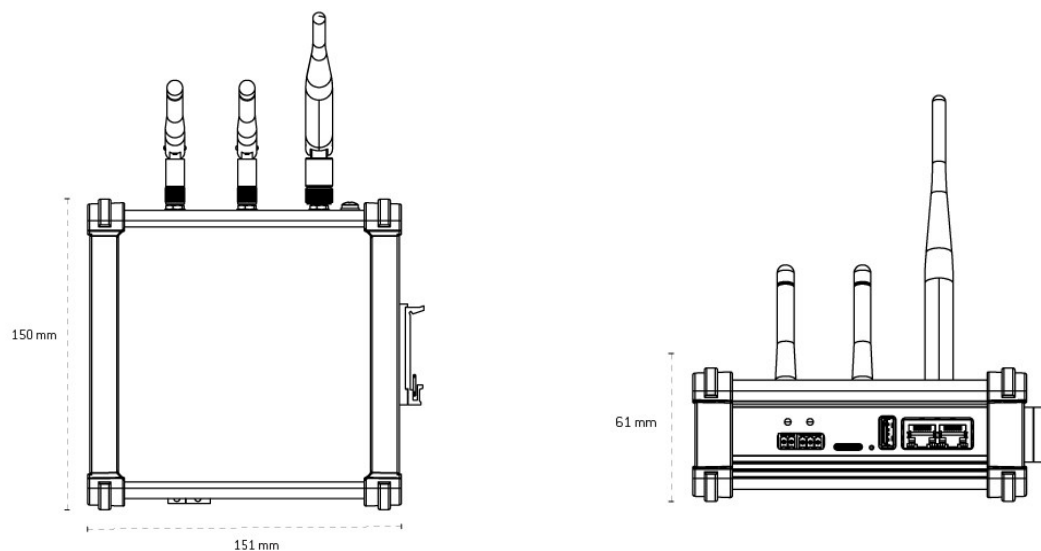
Dimensions of the Universal IoT Gateway with aluminum case.
